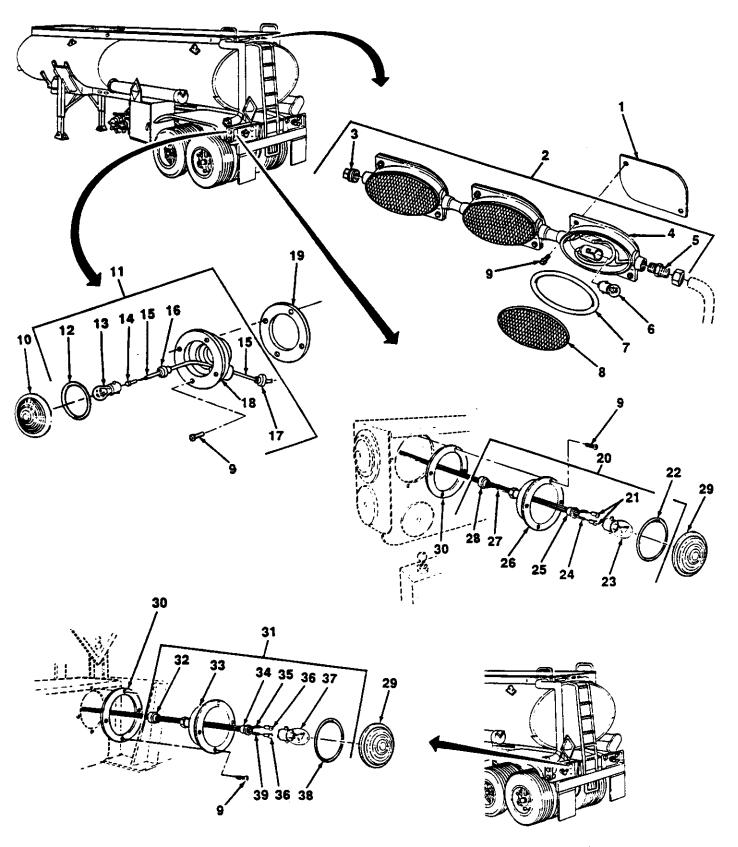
Rear Side Marker Light Assembly, Rear Marker Light, and Stop, Turn Signal, and Taillight Assembly.
